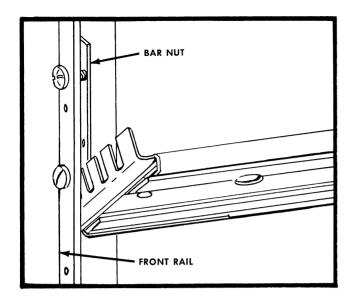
Mounting the Chassis-Trak stationary section to the front rail of the cabinet rack.
